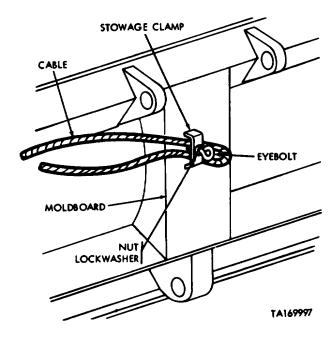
Removal or installation of eyebolt hole cable stowage clamp
